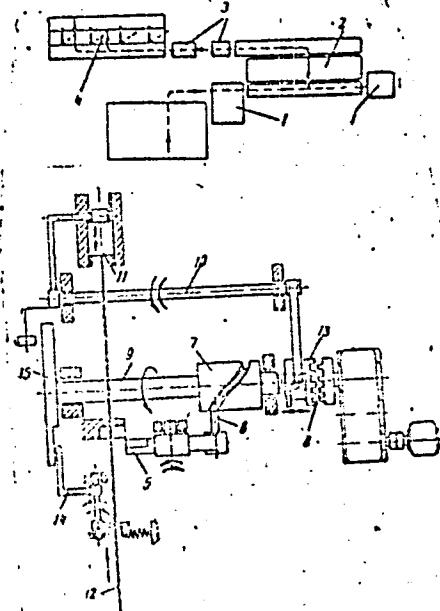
1 - assembly for adjusting and cutting; 2 - assembly for dismounting and transporting; 3 - defectoscopic assembly; 4 - assembly for sorting the usable and the defective products; 5 - movable blade; 6 - knife finger; 7 - knuckled drum; 8 - clutch; 9 - roller; 10 - lever; 11 - movable carriage; 12 - rod; 13 - semiclutch; 14 - lever; 15 - sprocket
